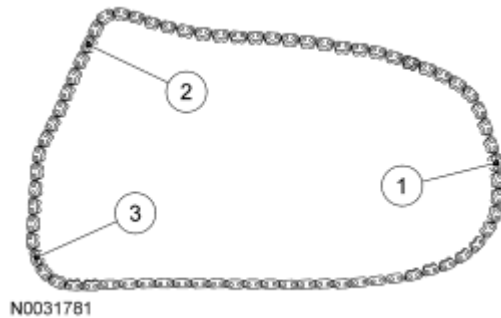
Locating Crankshaft & Camshaft Timing Marks On LH & RH Timing Chains
